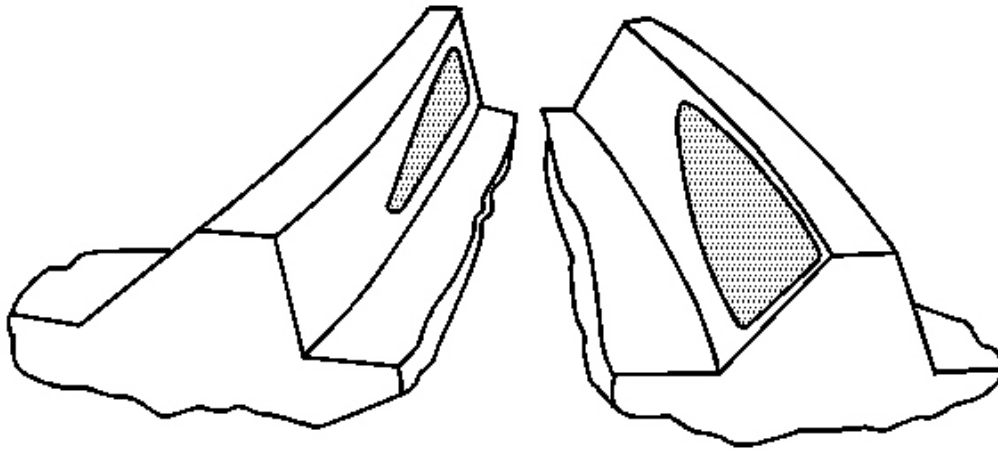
Drive Side Toe - Coast Side Heel Contact Pattern
